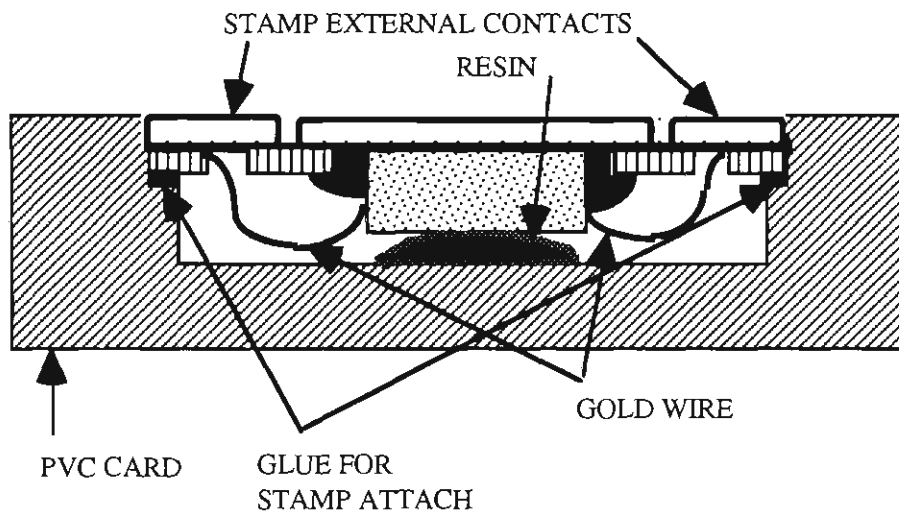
A cross sectional view of the smart card chip embedding components.
